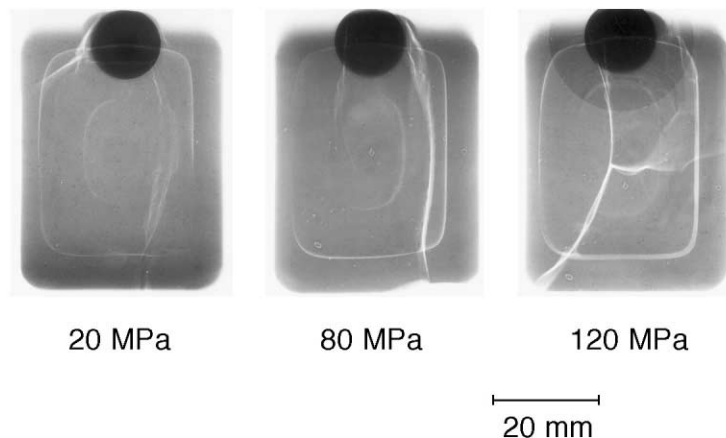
X-ray radiographs from 25-mm thick sintered alumina mouldings manufactured with various hold pressures.
